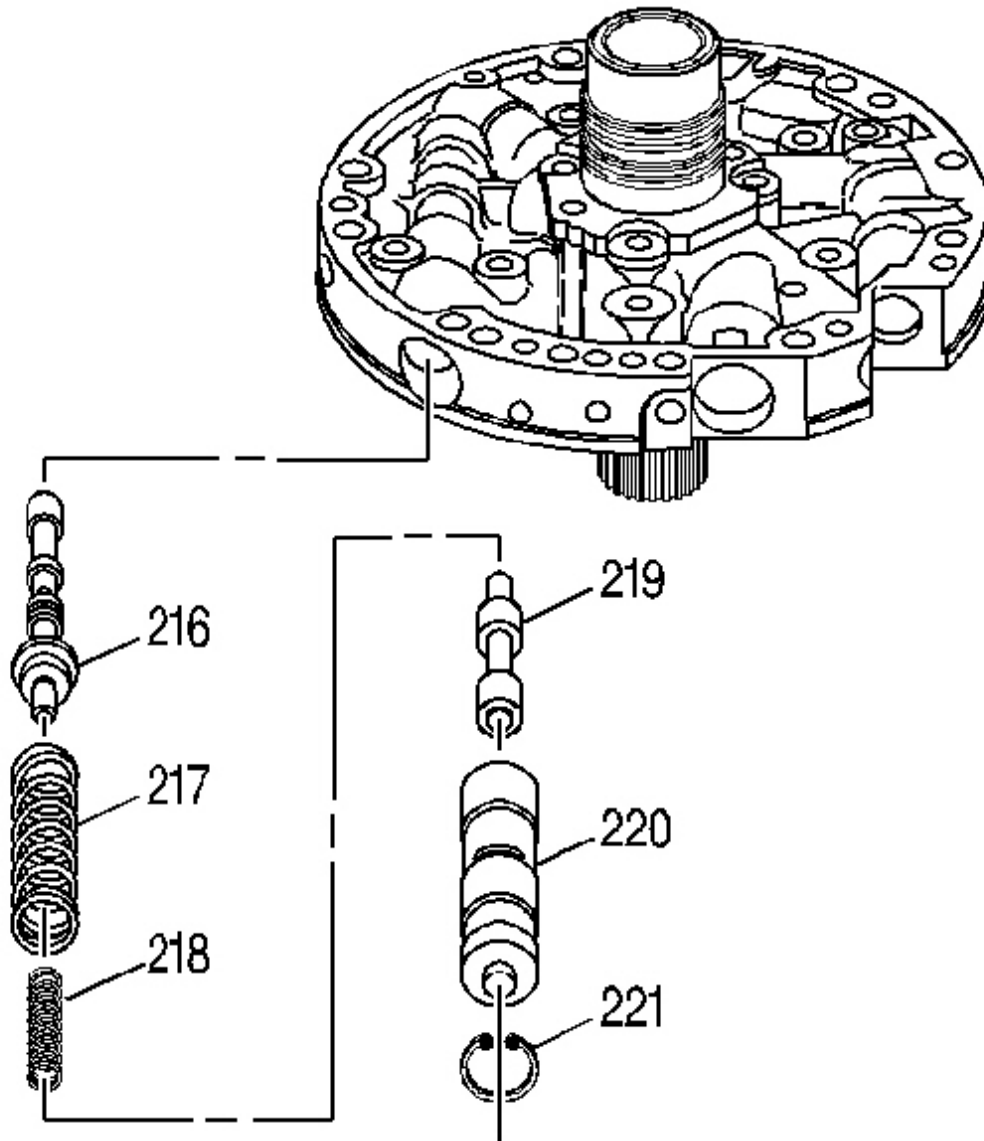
View Of Reverse Boost Valve & Pressure Regulator Components
